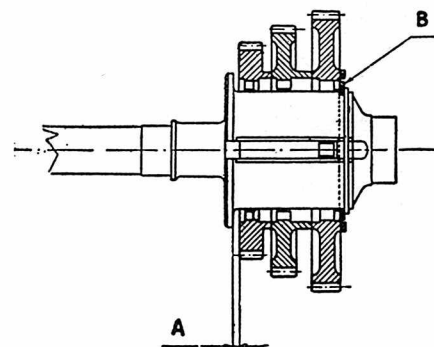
If end play of mainshaft gears measured at (A) exceeds 0.50mm (0.020 inch) install a thicker shoulder ring (B).
